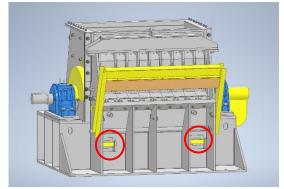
PM-KC & CS-KC Inspection Door (Left) & XL-KC Inspection Door (Right)
